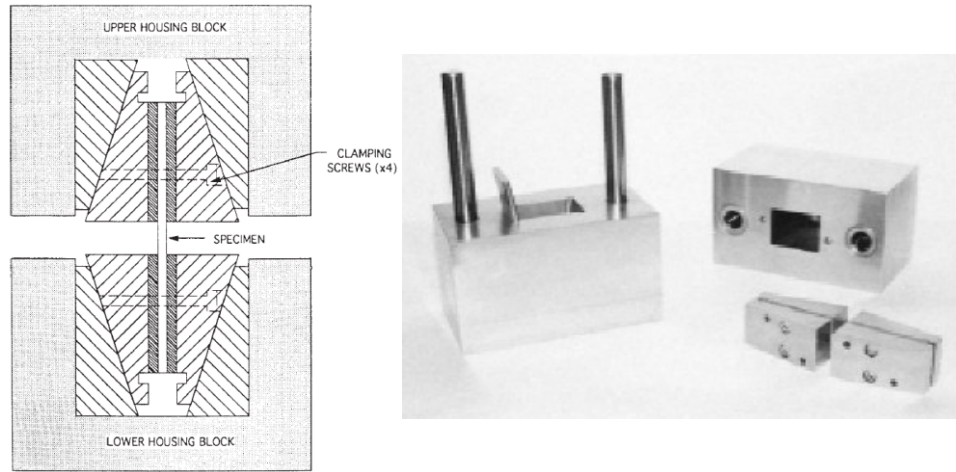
Compressive Test Fixture (IITRI Fixture) ^[17]
